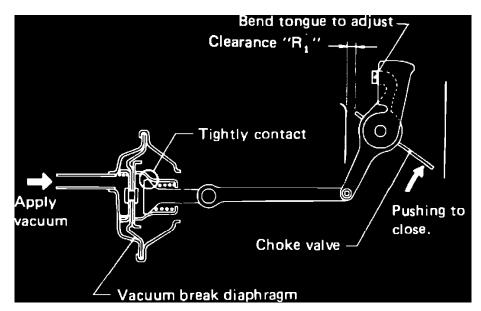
Vacuum break adjustment, below 41F ambient temperature.
